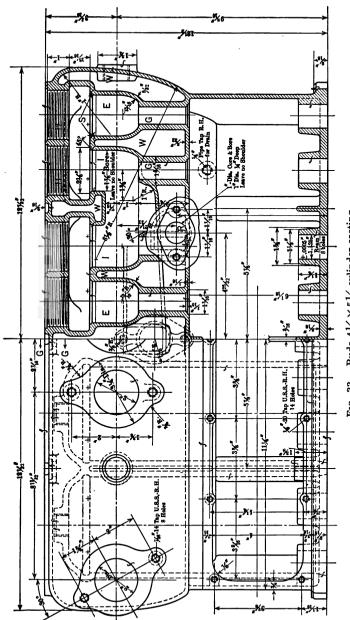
Buda $41/4 \times 51/2$ cylinder casting.
